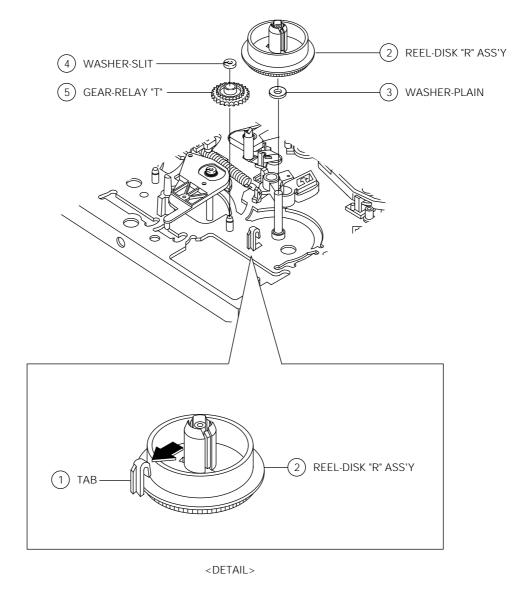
Reel Disk "R" Ass'y and Gear Relay "T" Removal
